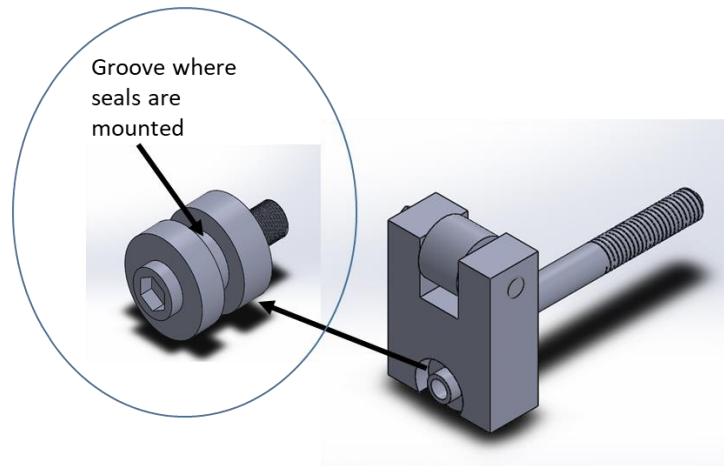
A specifically designed head to fix the O-rings to the tribometer
